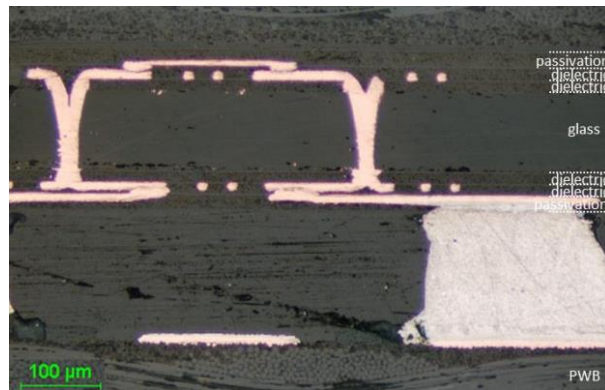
Cross-section image of RF module, showing BGA connections to the PWB.
